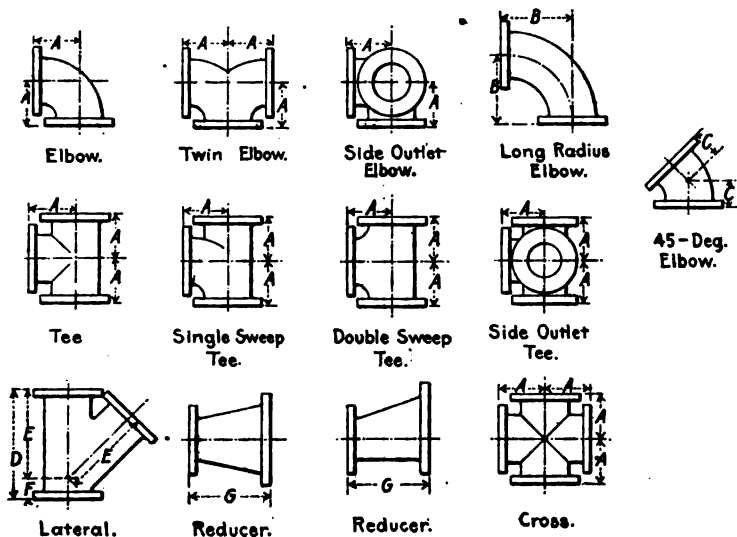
Standard Flanged Fittings for W. I. and Steel Pipe (see Table 36).
